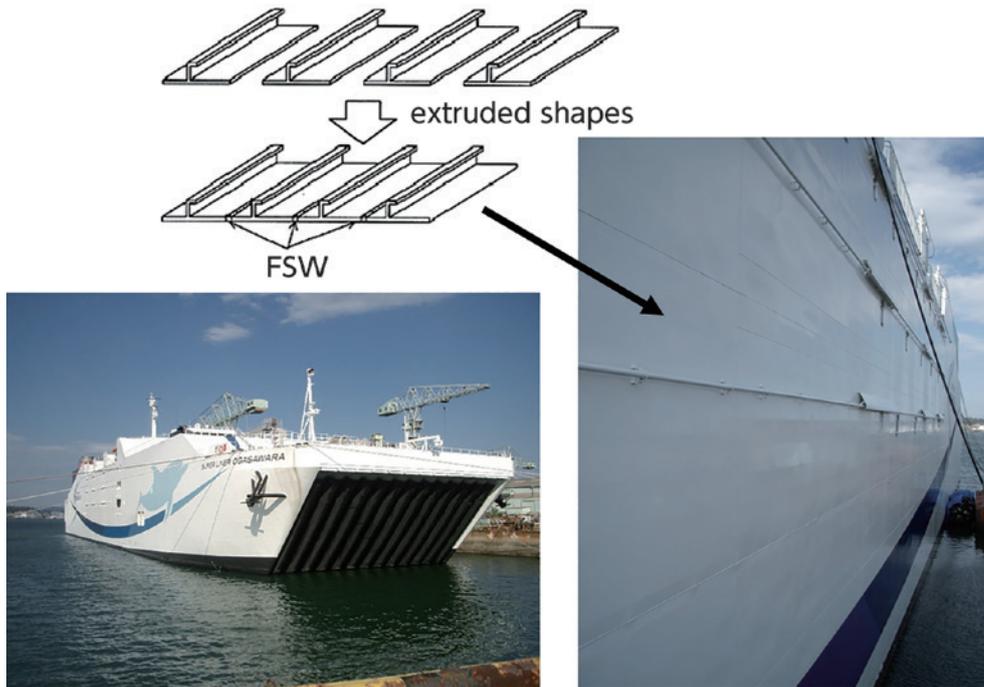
Techno Super Liner superstructure used aluminum alloy panels prepared by the FSW method.
